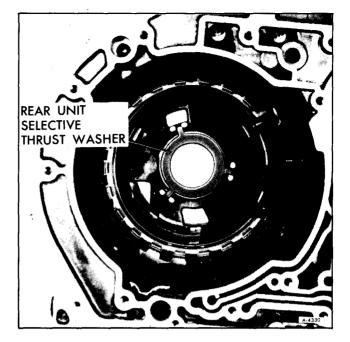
Removing and Installing Rear Unit Selective Thrust Washer
